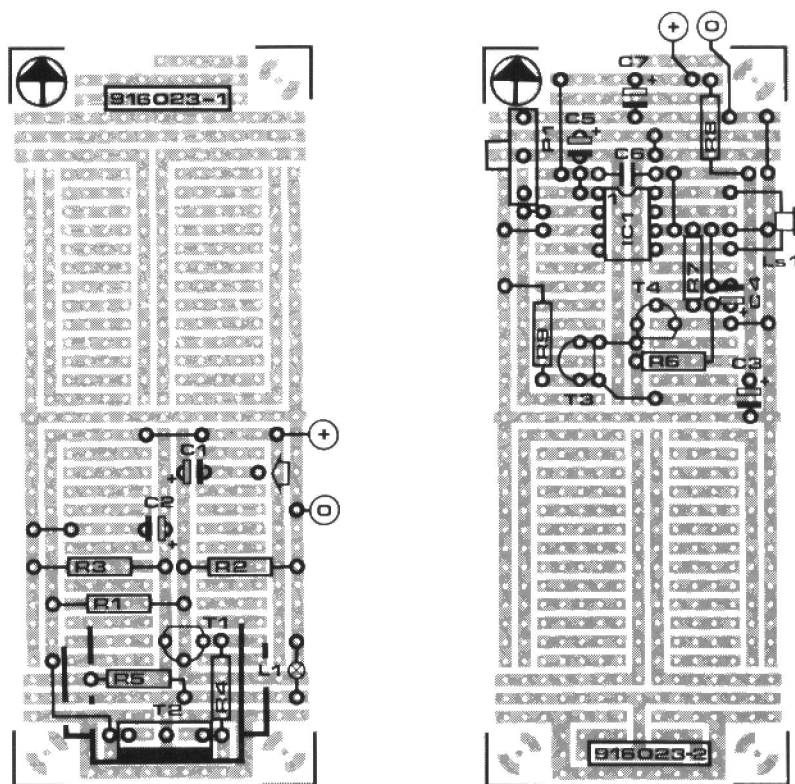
Component mounting plans of the transmitter (left) and the receiver (right). Both are built on ready-made prototyping boards (see the components list).
